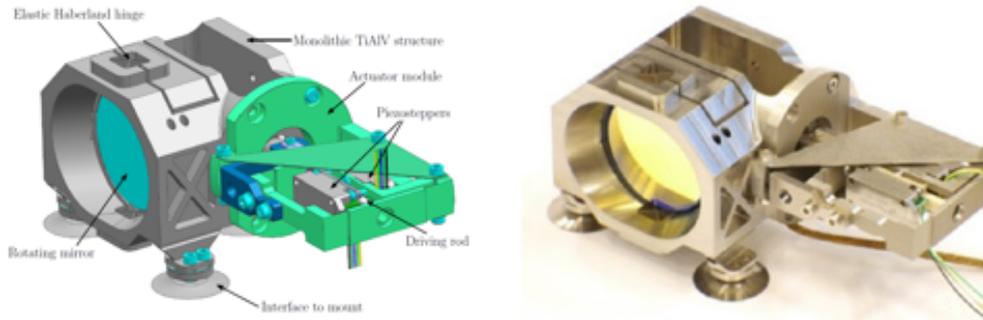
Left: CAD version of the latest IFPM design showing the most relevant parts. Right: the realized IFPM at TNO able to achieve millisecond angular pointing accuracy.
